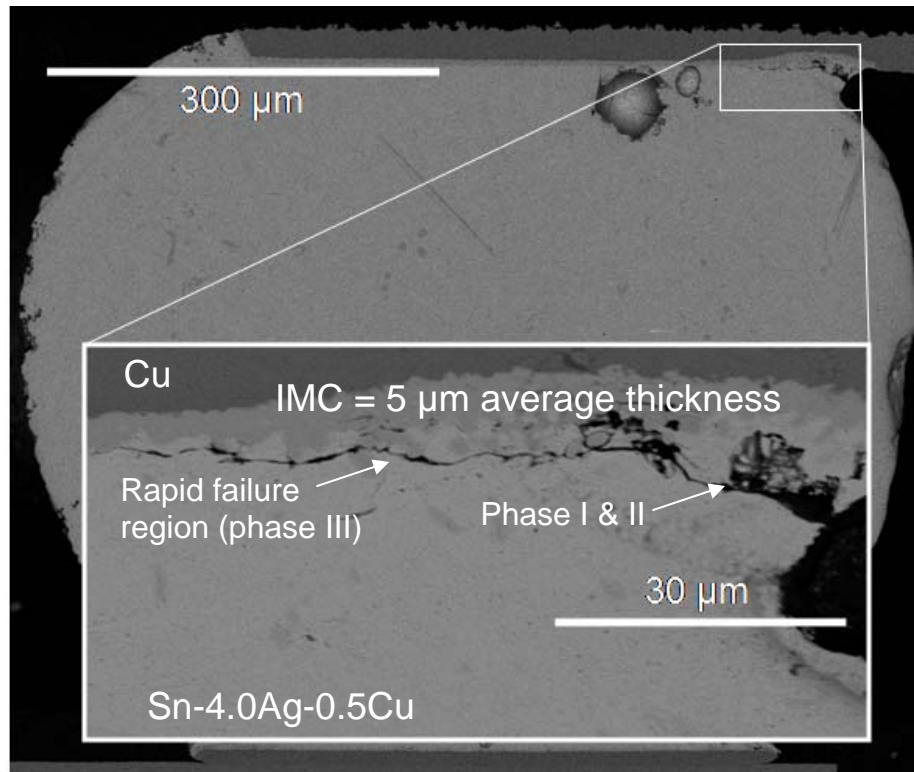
Fatigue fracture cross-section showing the crack path of Sample B
